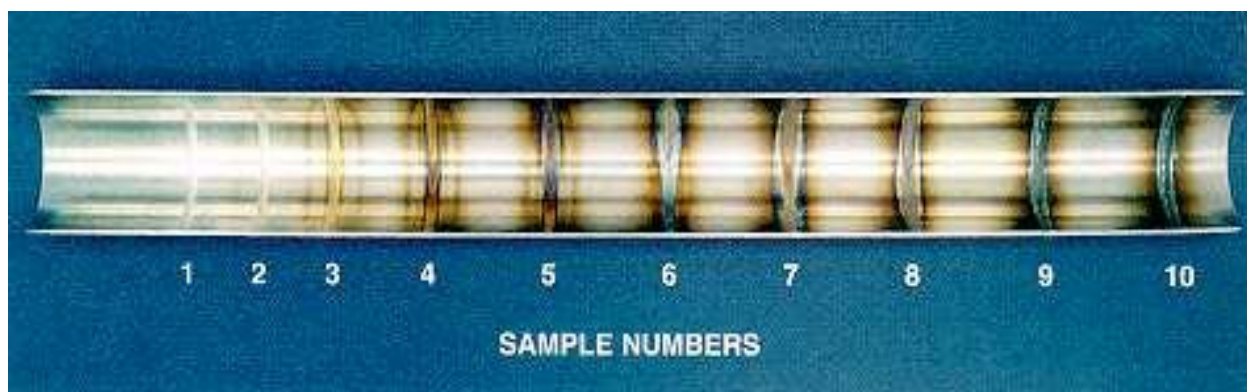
Acceptable and Unacceptable Weld Bead Width and Meander
